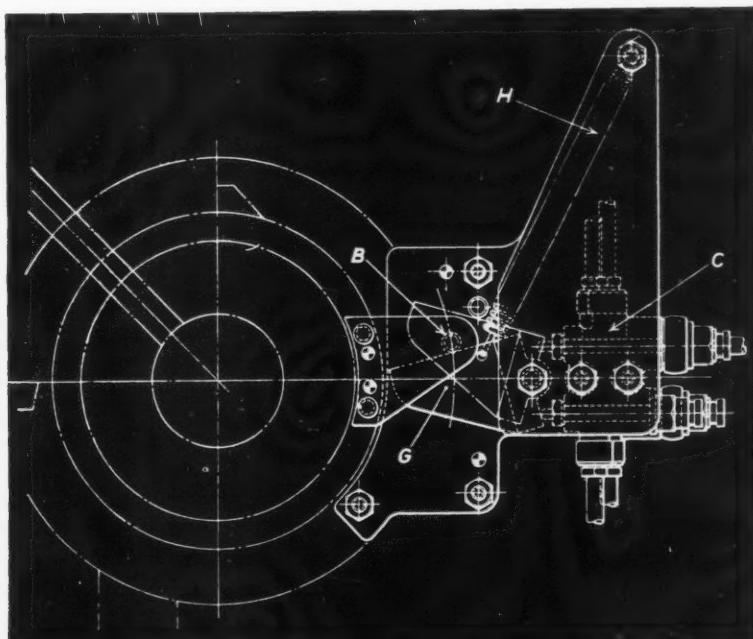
Valve operating mechanism for the jig shown in Fig. 2 is installed on the drilling machine feed disk
